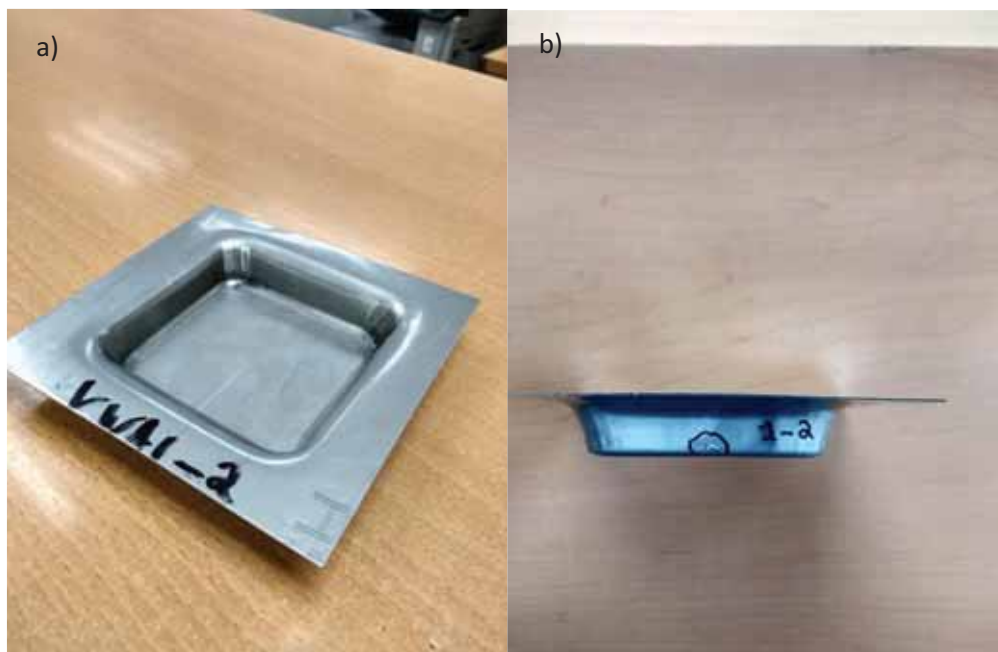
a) Pyramid Frusta A2 b) circled fracture.
